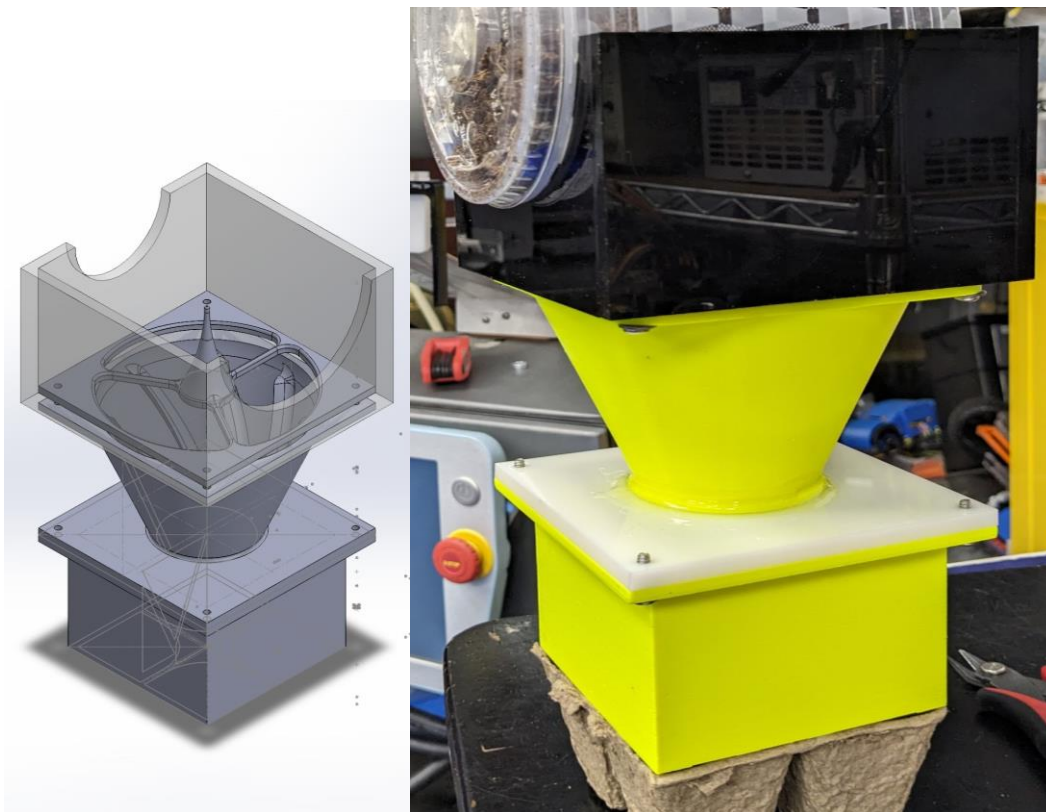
CAD assembly model (left) and completed (right) Dirt Dispenser V2.1.
